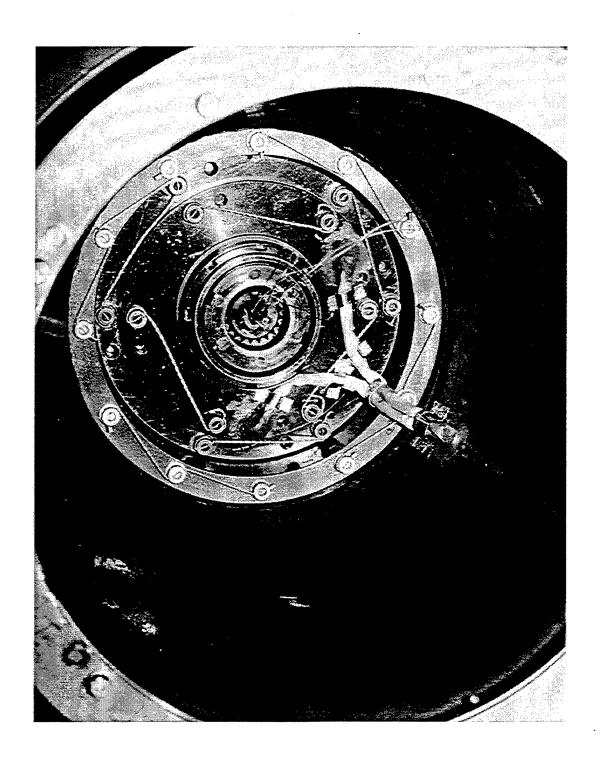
Spline portion of the spline shaft adapter and bolts in compressor main shaft.
